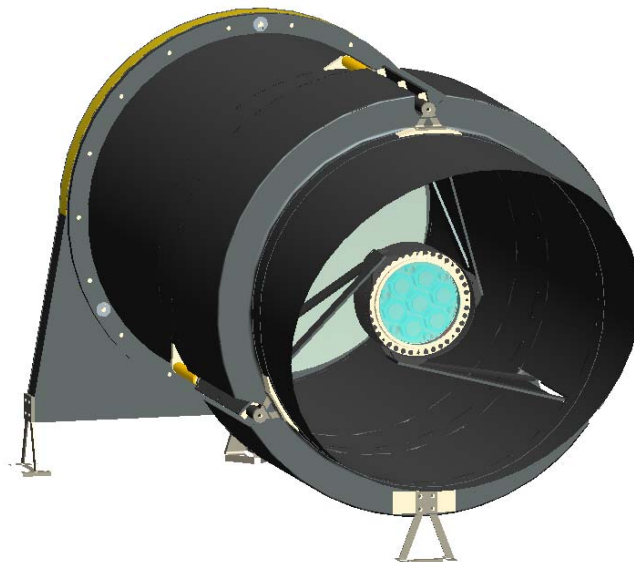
Front view of the RALCam-4 camera design showing the secondary mirror mounting spiders.
